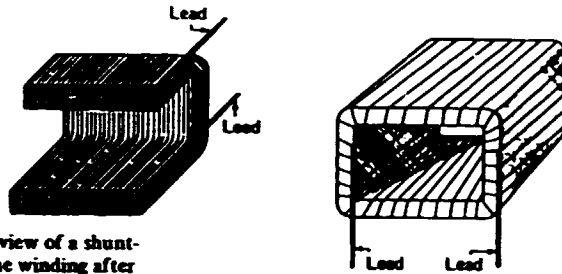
A cutaway view of a shunt-field winding and the same winding after taping.
